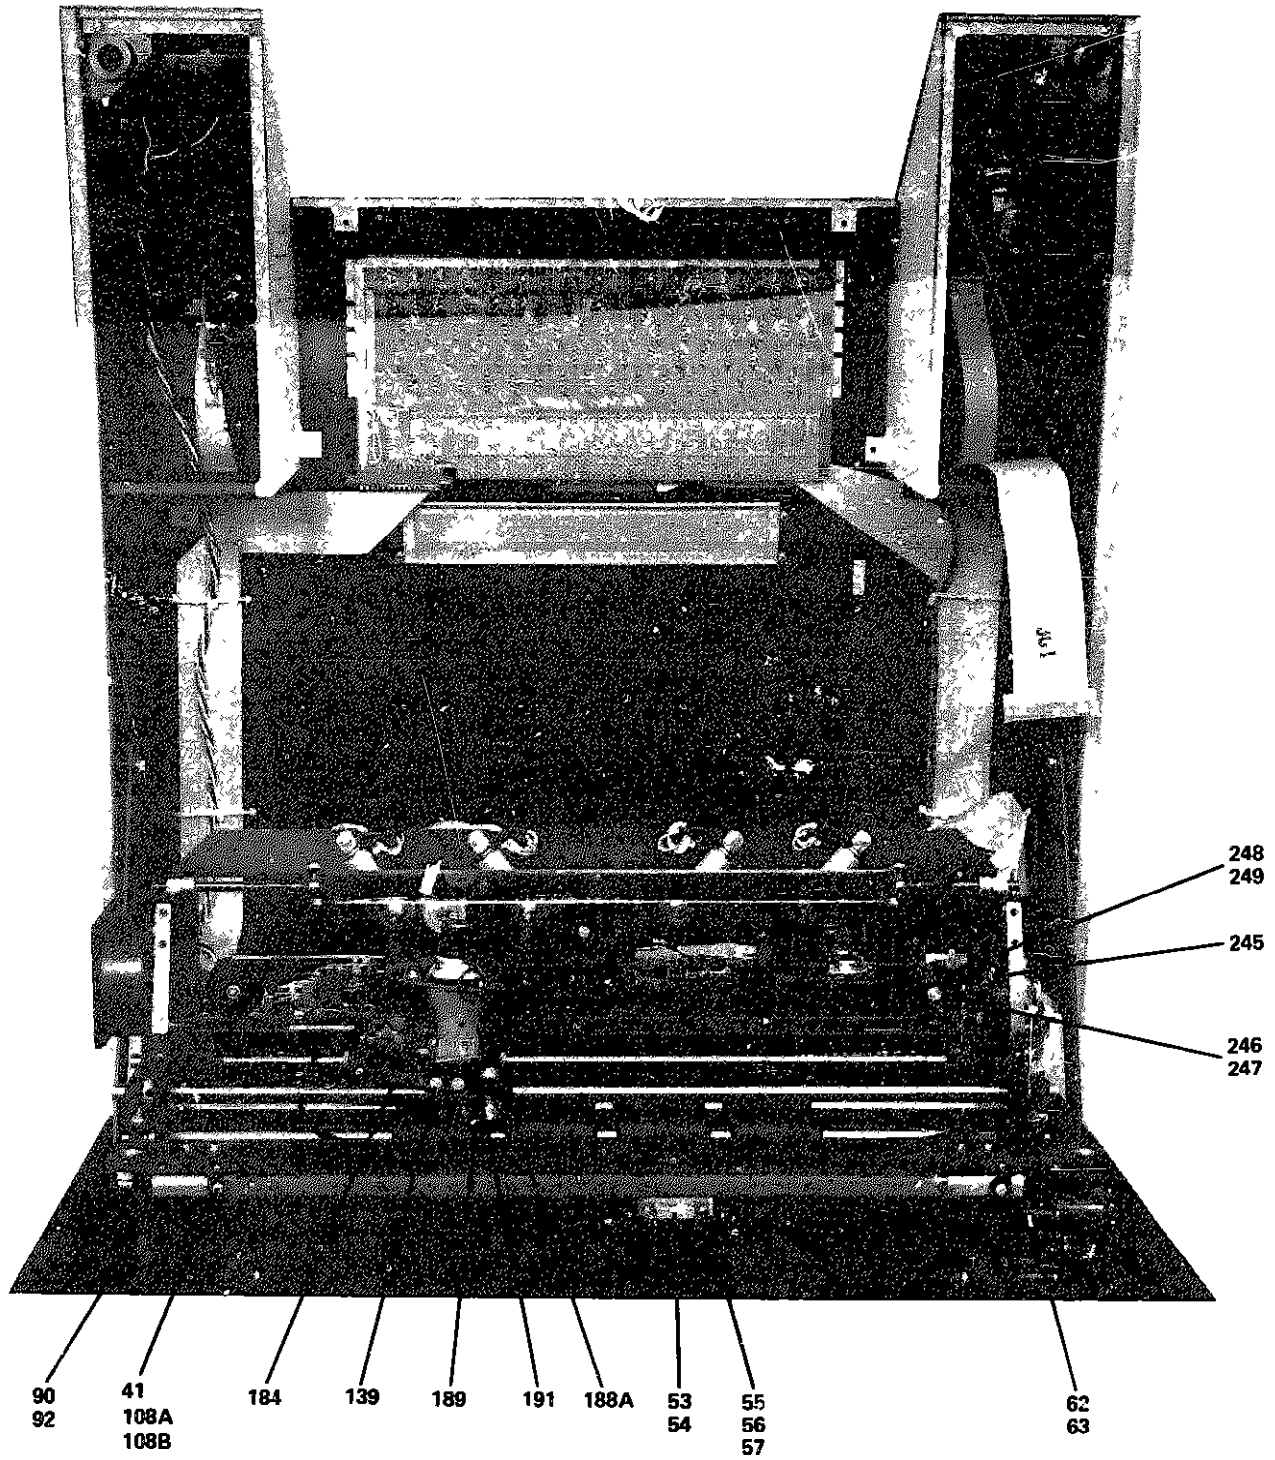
Read Head and Paper Drive Assembly Front 1A (Sheet 2 of 8)
